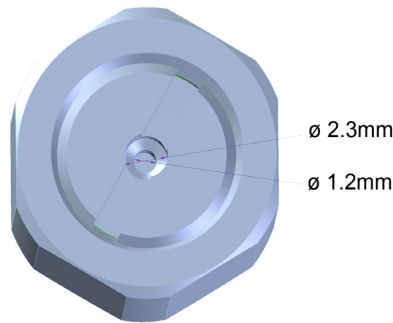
Pilot Line Bleed Valve Rear View (Vent Hole Diameter Shown)
